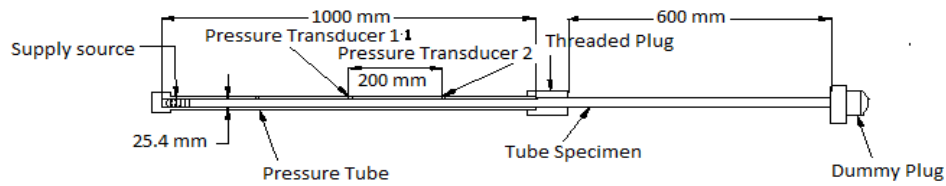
Tube assembly for high pressure hydrostatic testing of tube specimen.
